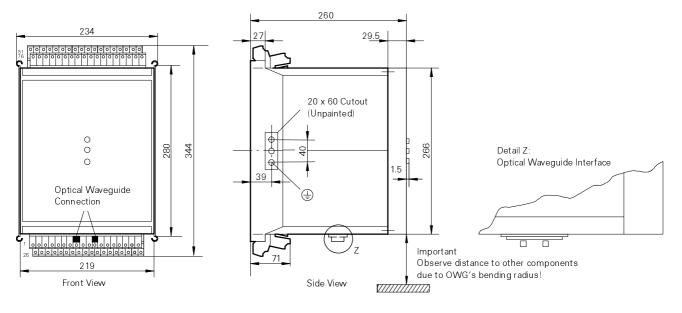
Dimensional Drawing of 7XP2040-1 for Panel Surface Mounting, Device Version 7SA519 (all dimensions in mm)
